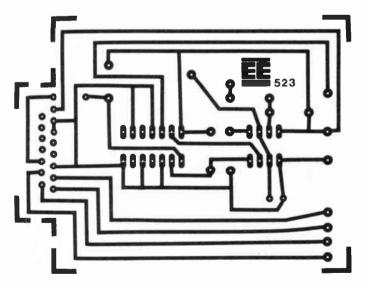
Layout and wiring of the p.c.b. for the Joystick Adaptor.
